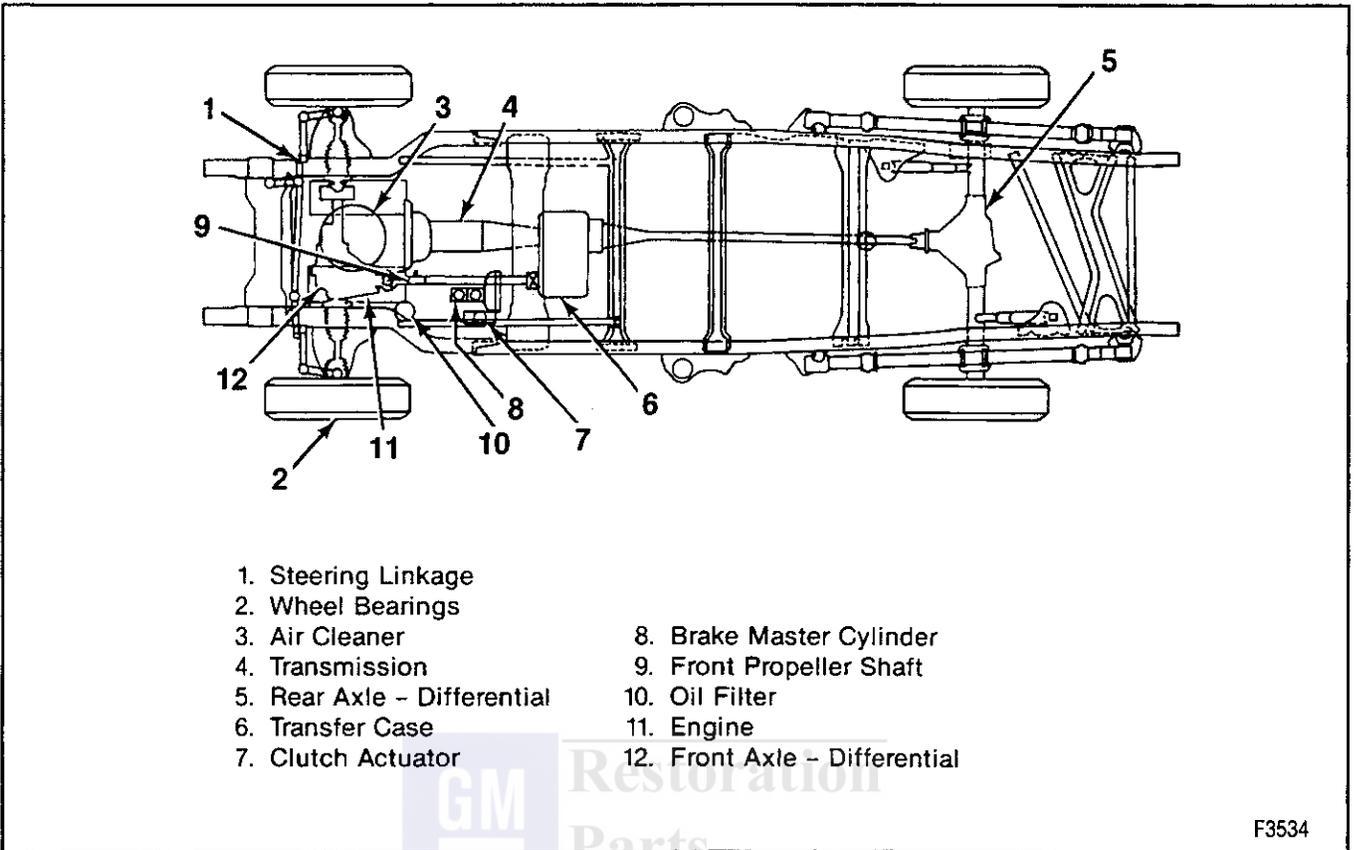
Lubrication Points (Four-Wheel Drive Models)
